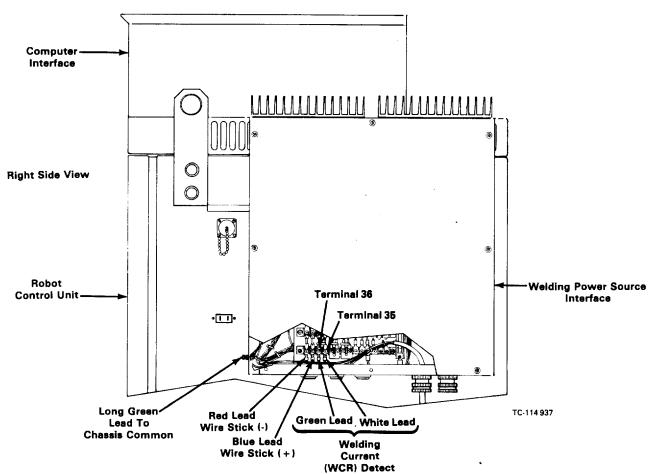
3. Welding Power Source Interface Connections
